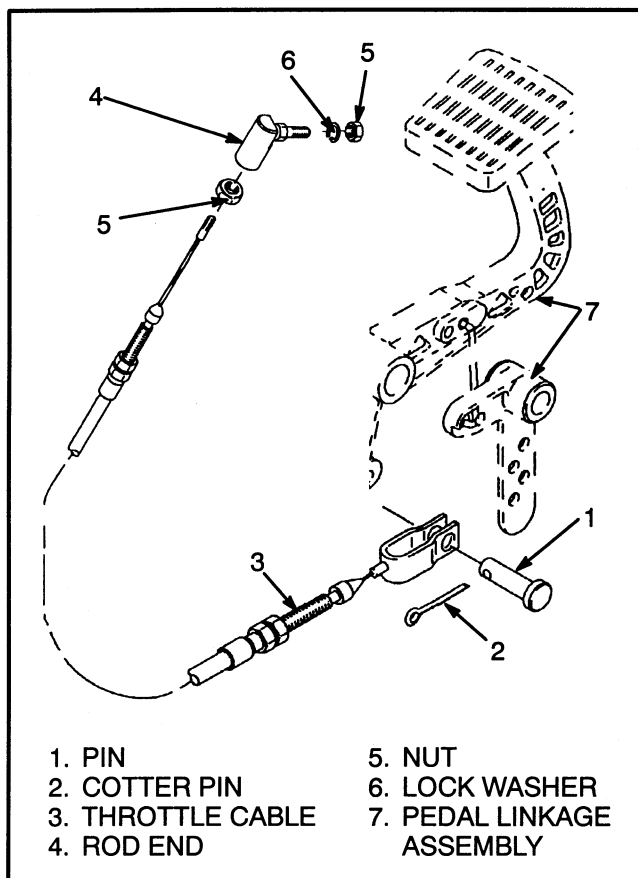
THROTTLE CABLE ARRANGEMENT
